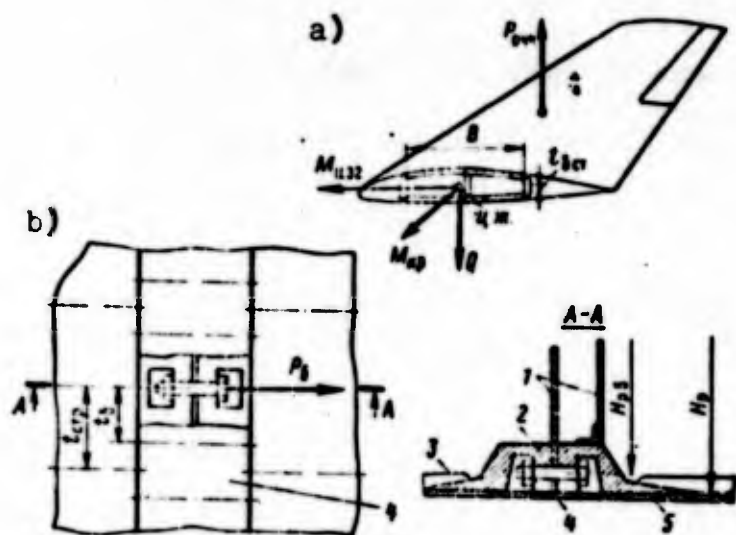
Towards the rating of a contour attachment: a) forces in the joint; b) loading of a panel bolt (bottom view); 1 - rib; 2 - joint profile; 3 - stringer; 4 - overlapping strip; 5 - skin.
